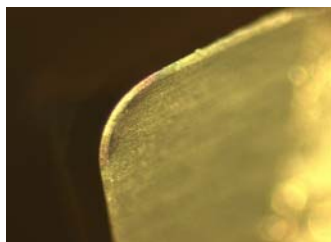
Cutting tool inserts: square CBN with no chipping, after milling process
